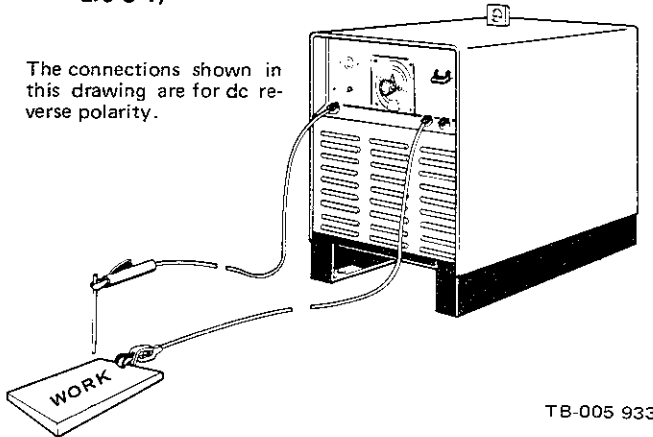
Shielded Metal-Arc Welding Connections
